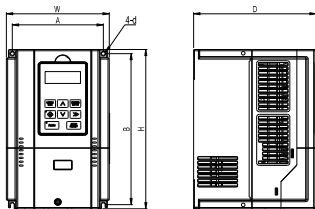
Outline, mounting dimensions for products of R2~R4
